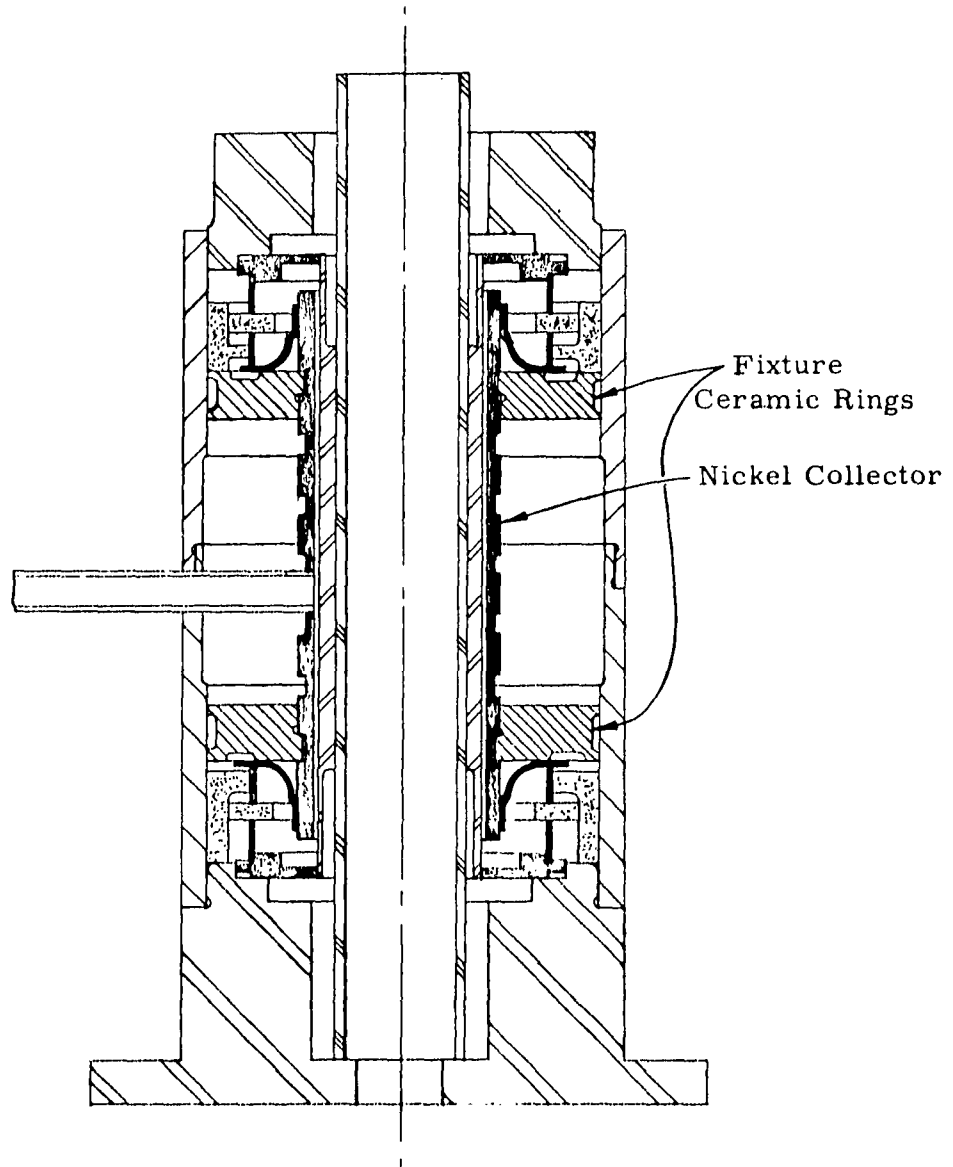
EMITTER-COLLECTOR-ASSEMBLY
